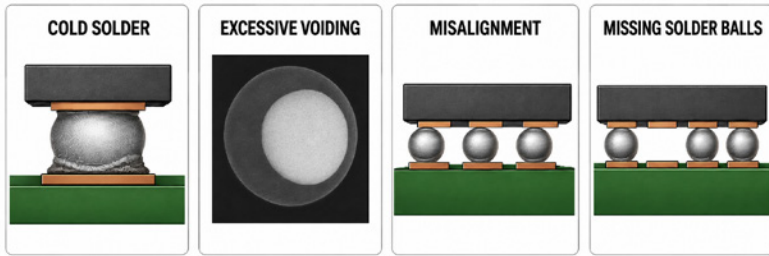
Common BGA defects, including cold solder, excessive voiding, misalignment, and missing solder balls.
